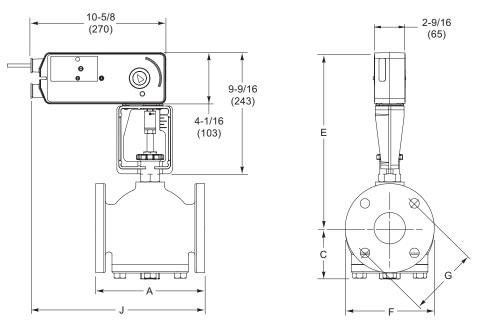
Mx61-720x with 2-1/2" to 4" N.C. 2-Way Flanged Globe Valve.
